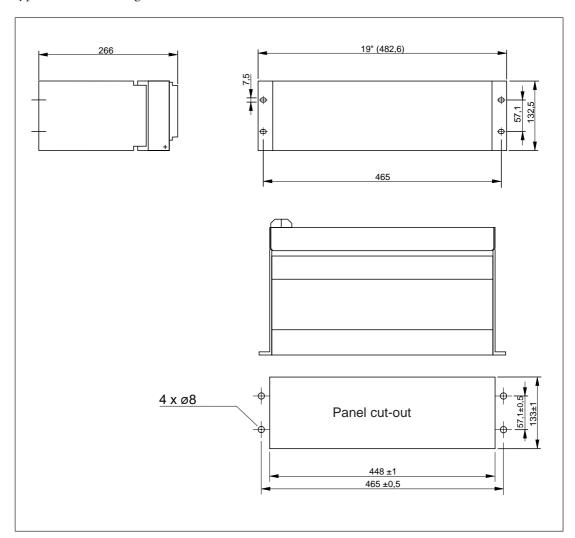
Mounting and dimensional drawings of feeder terminal SPAC 539 C
